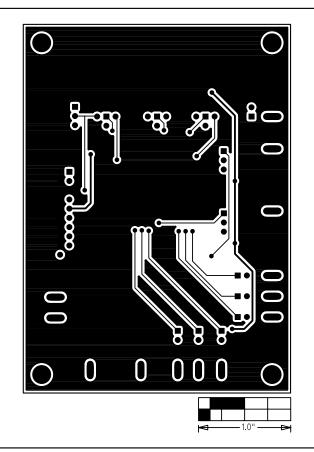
MAX7315 EV Kit PCB Layout—Solder Side
